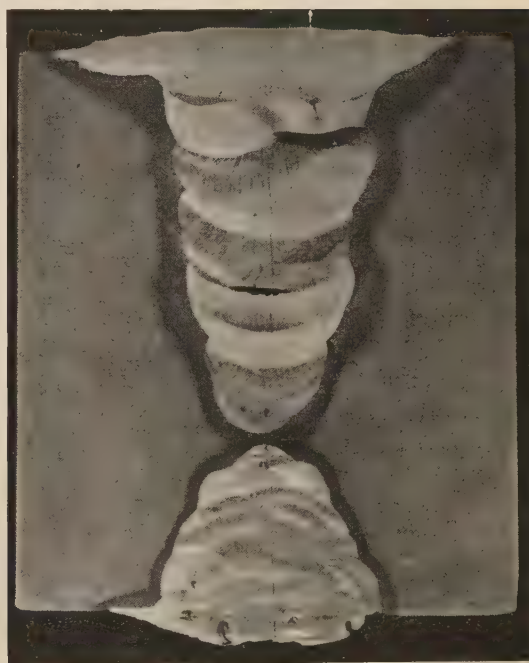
Butt Weld on 3-in. Low-Alloy Steel Plate, showing entrapped slag. (Actual size.)
